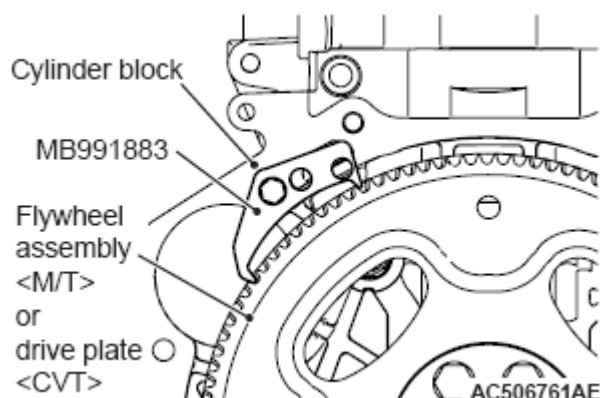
Fixing Flywheel Assembly Using Special Tool
